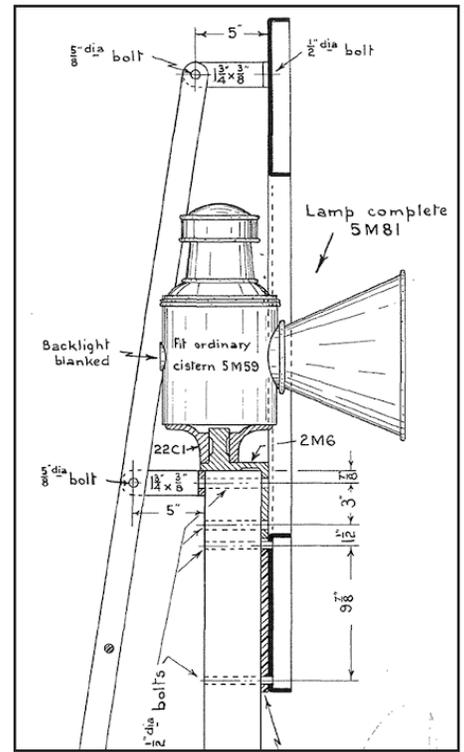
Attach the ladder base (3d printed part) to the bottom of the ladder with superglue. Attach the ladder to the ladder bracket. The ladder stiles splay out at the top to join to the upper ladder bracket. Solder in place. Glue the bottom of the ladder to the base.
